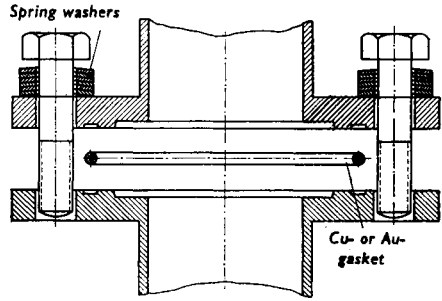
Unit flange seal. Normal flange with additional groove and copper or gold ring gasket.
